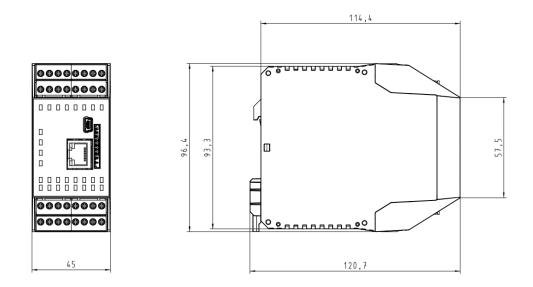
SP-COP1 / SP-COP2 dimensions (mm)
